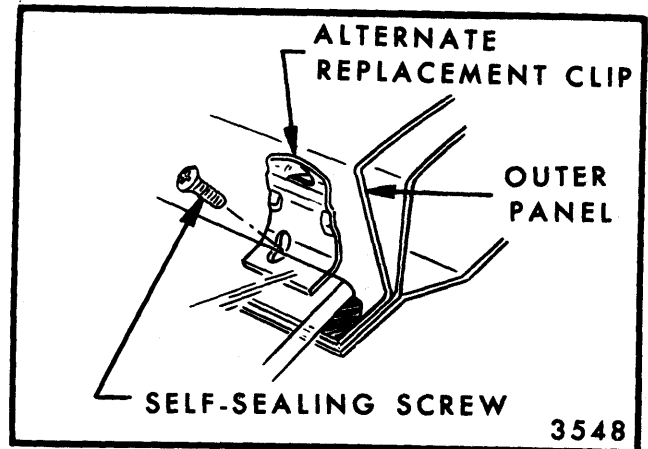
Reveal Molding Clip Alternate Replacement
